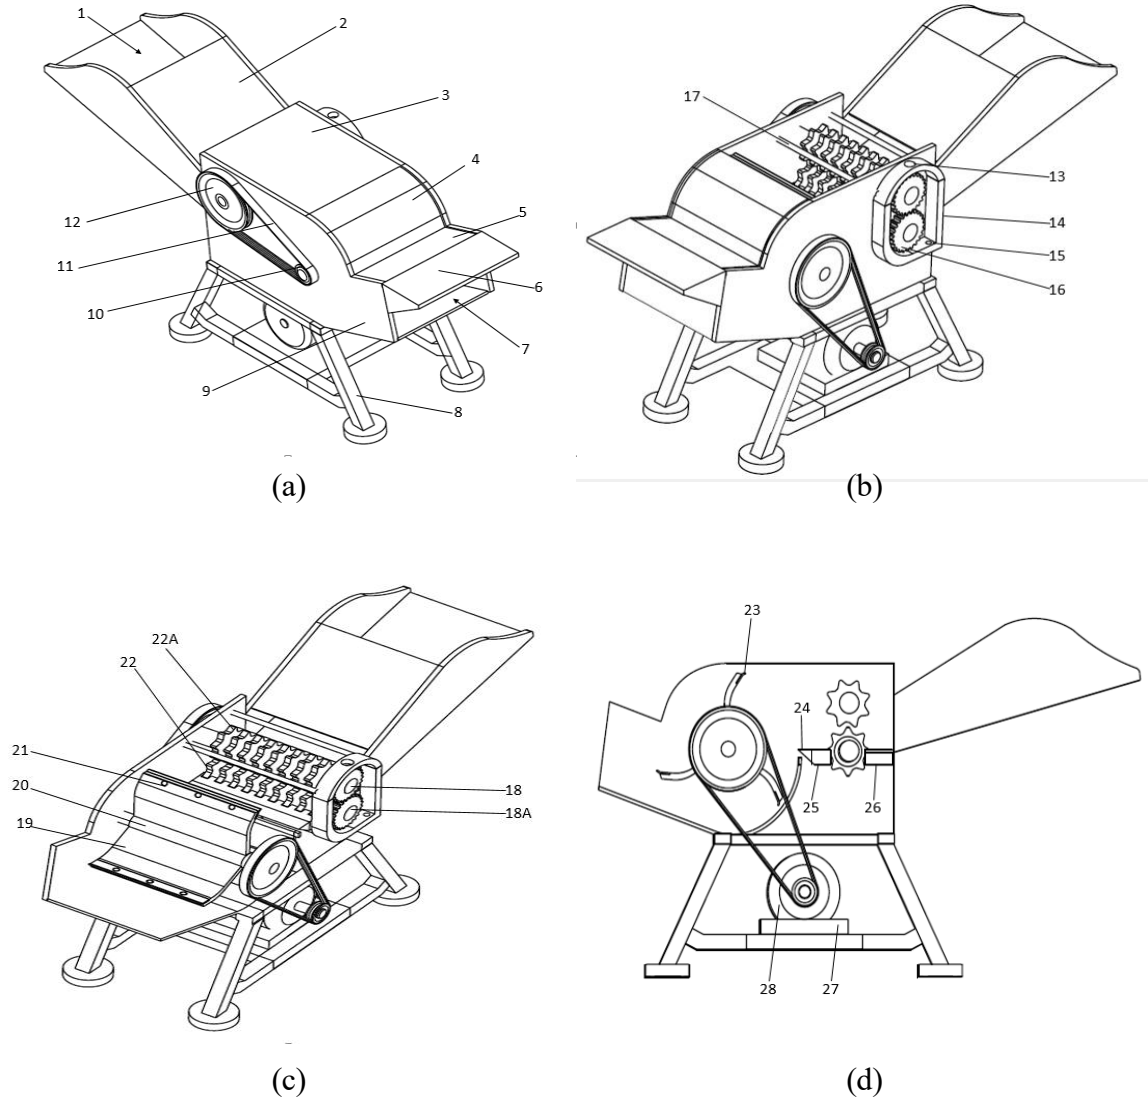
(a), (b), (c) Schematic of chaff cutter machine, and (d) Side view of chaff cutter machine
